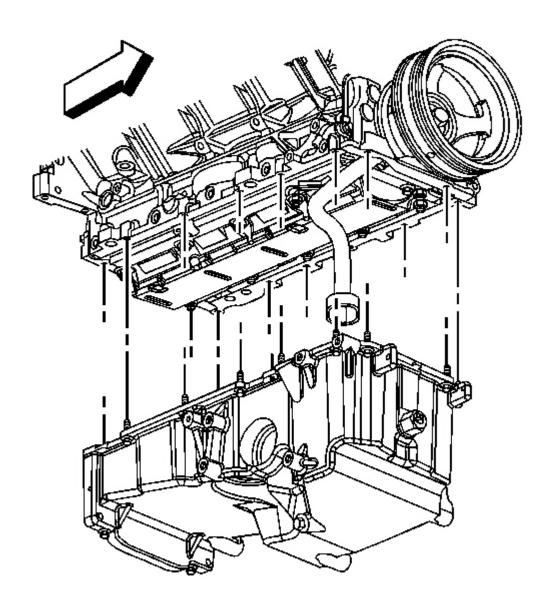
Oil Pan Assembly Removed Courtesy of GENERAL MOTORS CORP.
